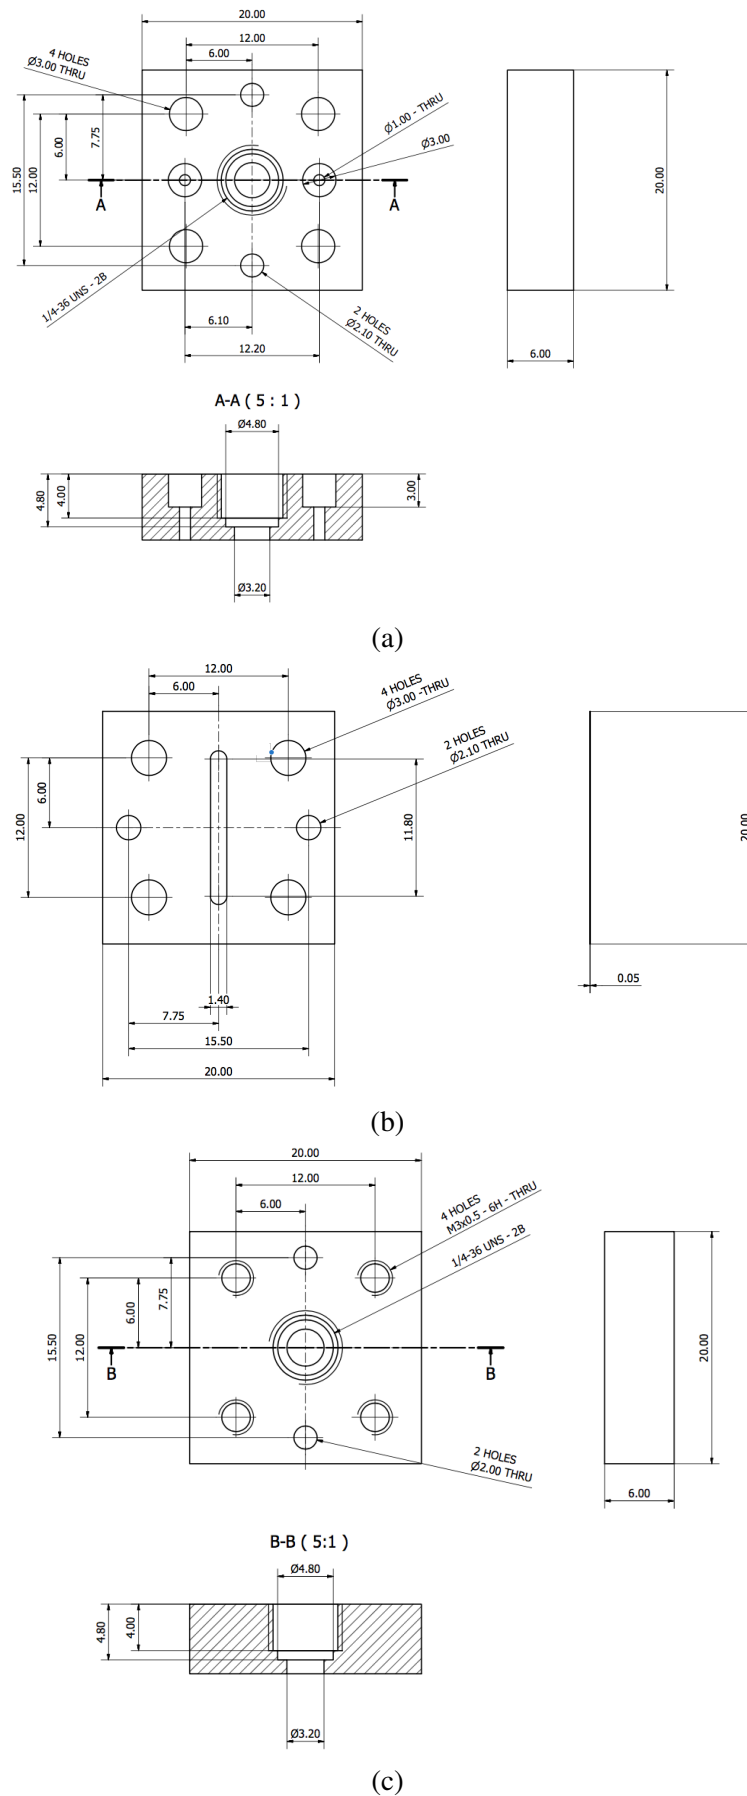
Engineering drawings of device 2. (a) Top layer; (b) Middle layer (50 μ m stainless-steel shim); (c) Bottom layer. Dimensions are in millimetres.
